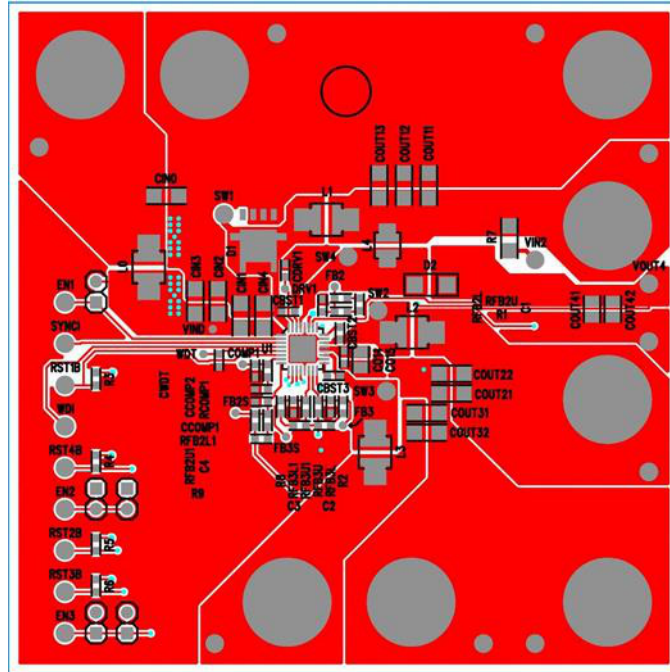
NCV97400GEVB PCB Layout – TOP Layer
